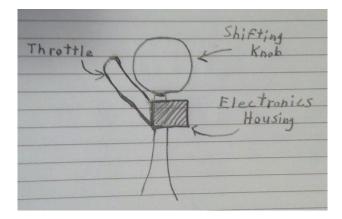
Accelerator and Shifting Lever on Shifting Knob Design
